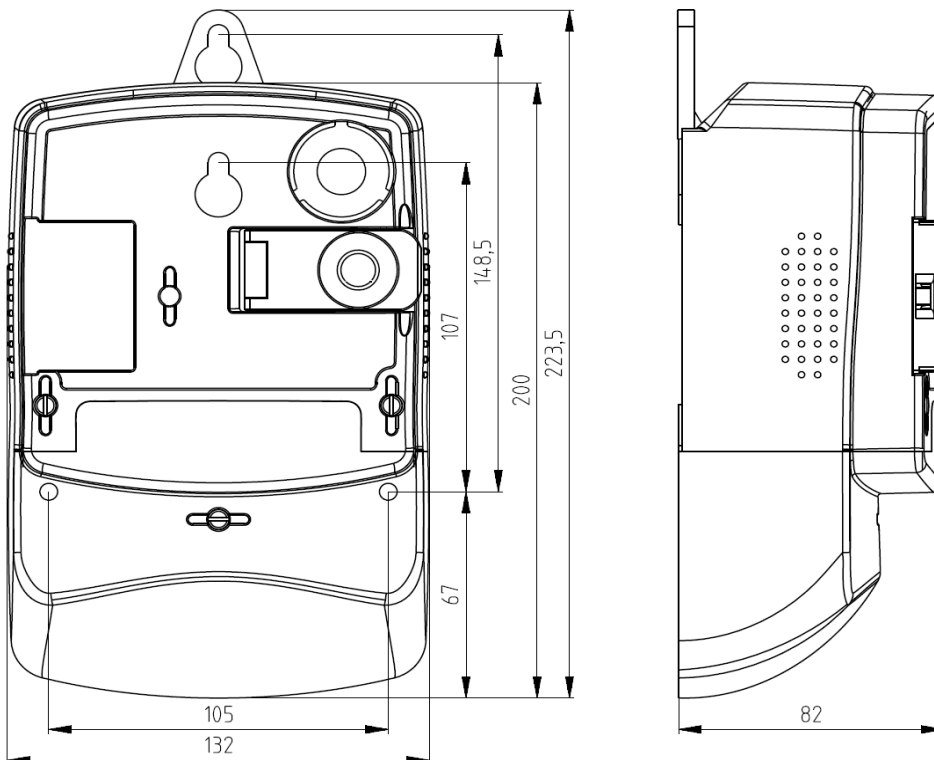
Overall and fixing dimensions of the ME382-D3 meter fitted with a regular terminal cover
